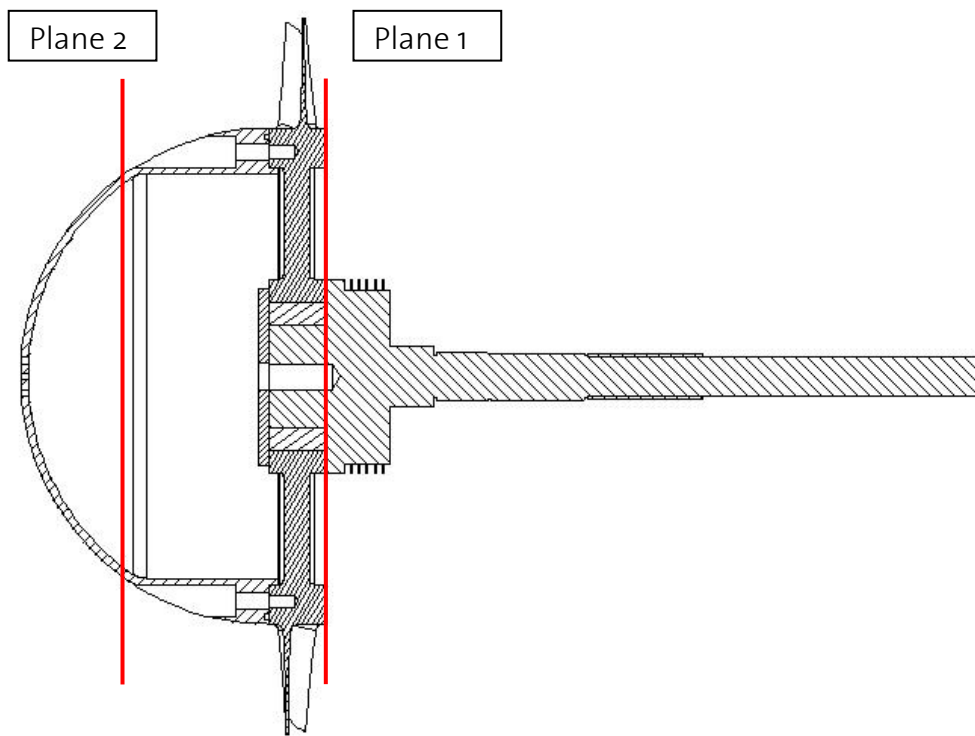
Rotor-Shaft Assembly with Two Balancing Planes indicated.
